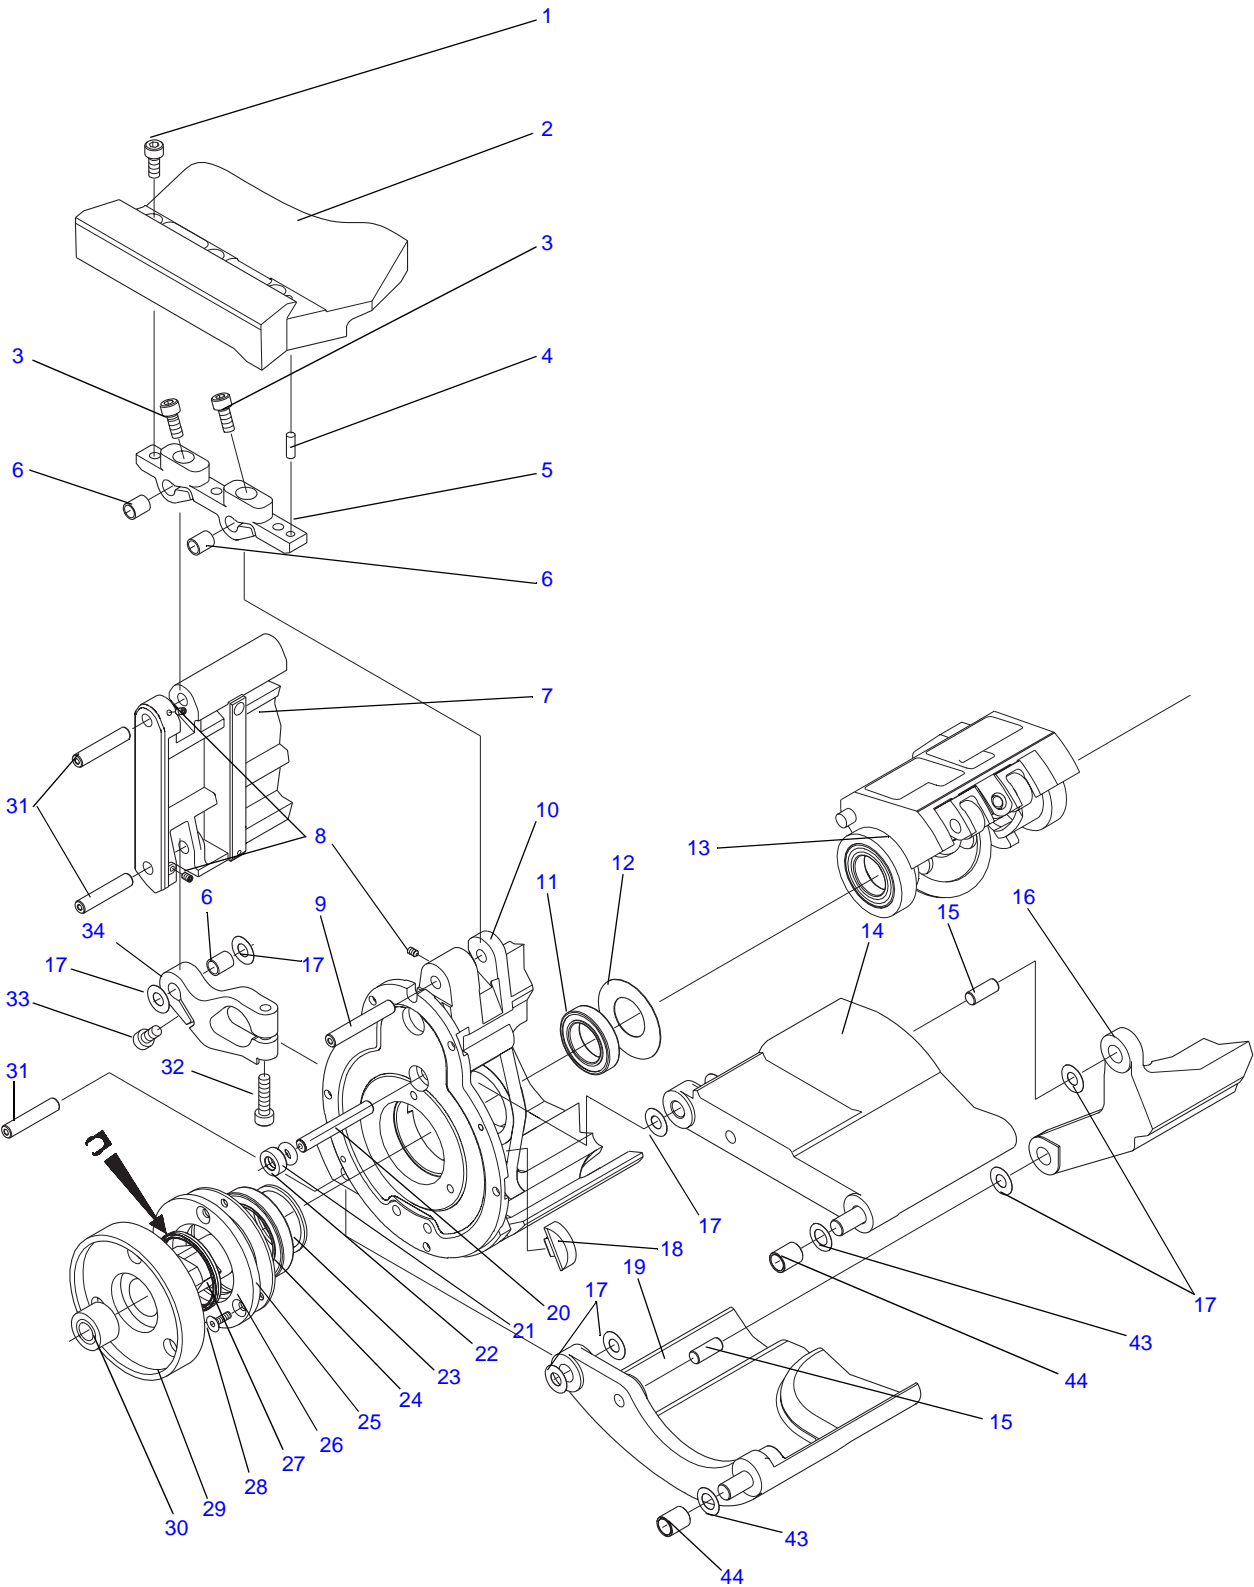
Vector 70/70H Pan and Tilt Head - Brake Lever Support Cap Assembly
